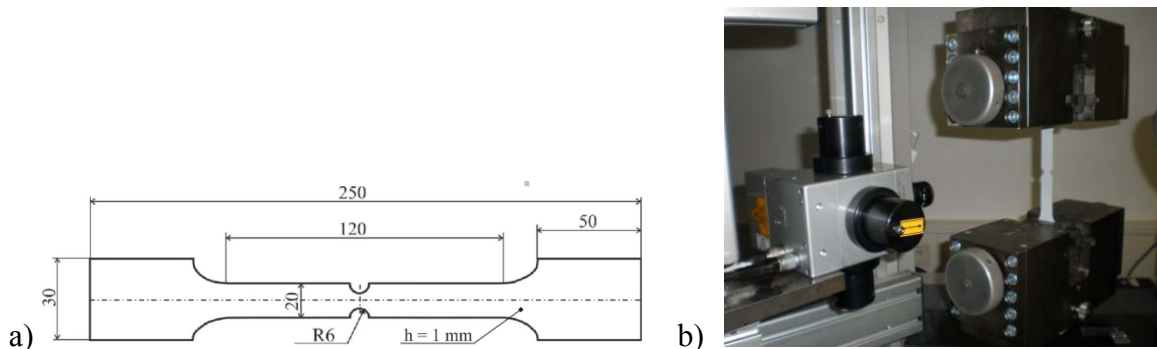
a) Investigated specimen b) Optical device Q-300 Dantec Dynamics with short illuminating arms, the specimen clamped by universal testing device Zwick Z020
